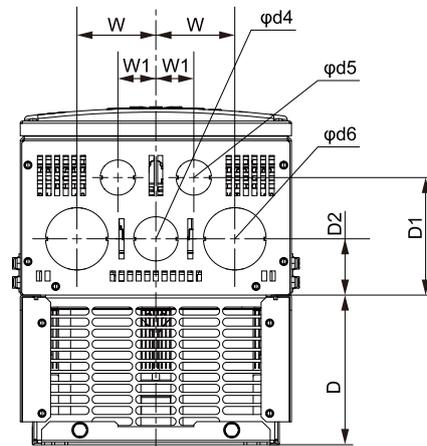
Exterior and Mounting Dimensions Diagram 6 (Models: 2169, 4140, and 4168)
